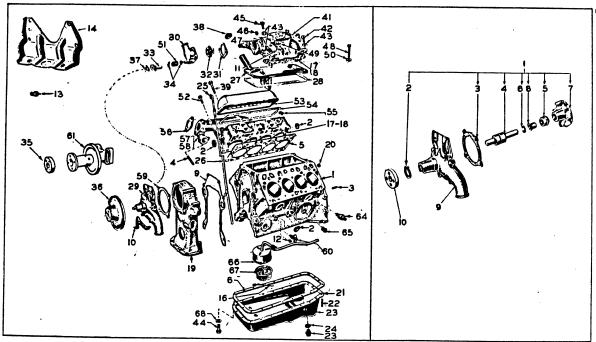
EXTERNAL VIEW, ENGINE PARTS GROUP
